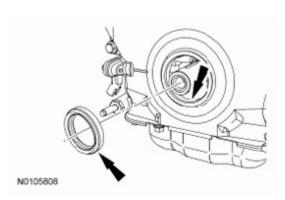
Locating Crankshaft Front Seal Inner Lip Courtesy of FORD MOTOR CO.
